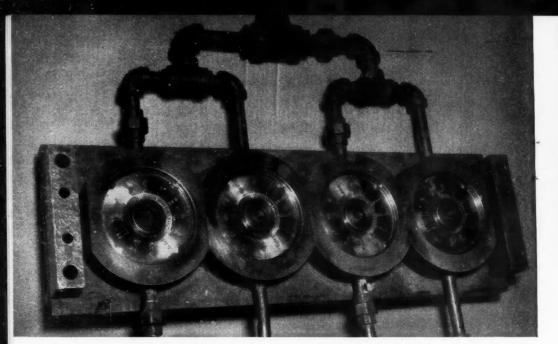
Dies from which American Insulator Corp. has molded plastic faces for clocks. These tools were Vapocarb-Hump hardened and Homo Tempered.
